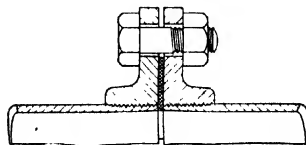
FLANGES SCREWED AND EXPANDED ON
